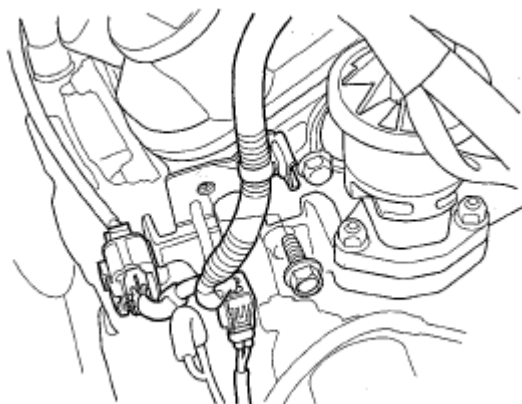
Identifying Connector Bracket Bolts And Fuel Rails
